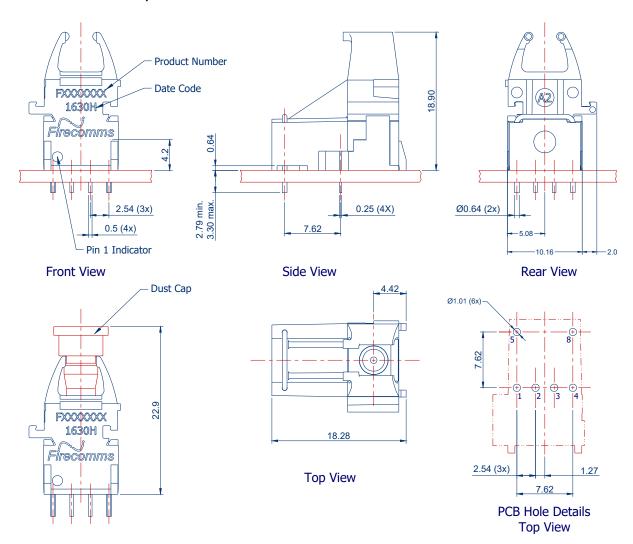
Mechanical dimensions of the vertical receivers and PCB footprint, which is a top view General dimensional tolerance is  $\pm\,0.2$  mm
